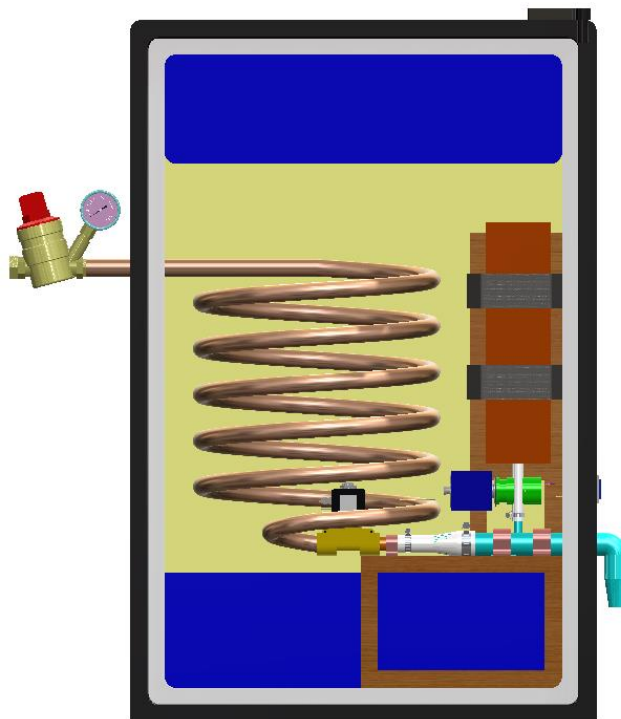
CAD Model of the complete prototype model that will be used for testing.
